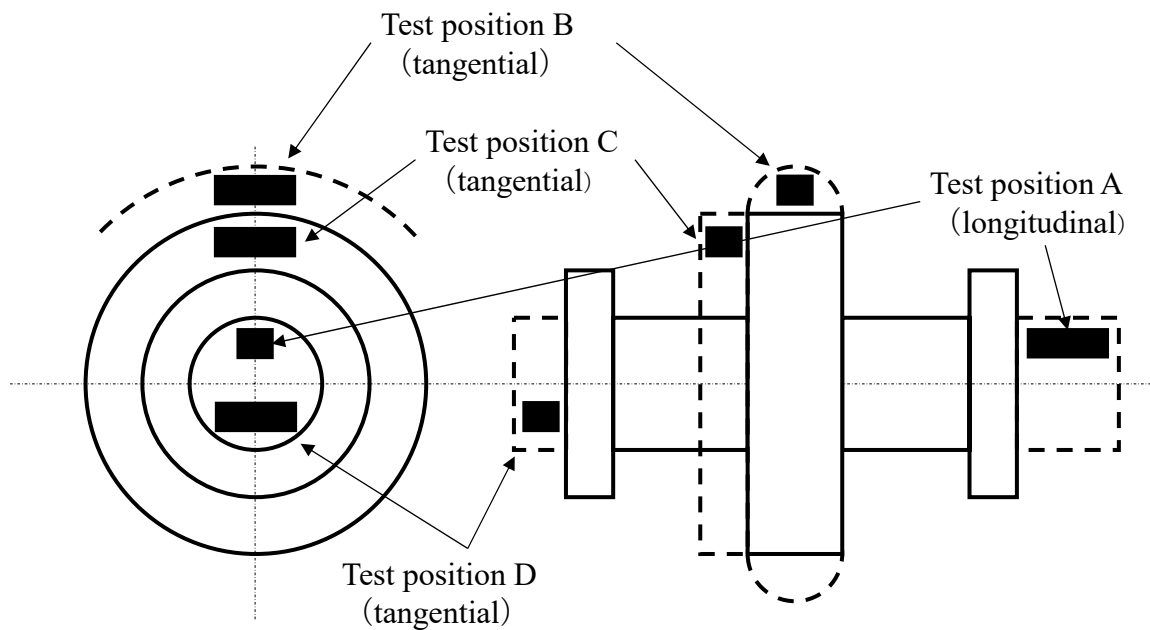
Alternative Directions or Positions for the Test Specimen for Flanged Shafts with Collars
